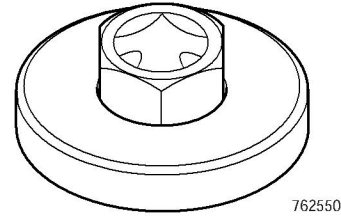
892/01154 Fuel Injection Pump, Tool For Removing The Tamper-proof Cover
